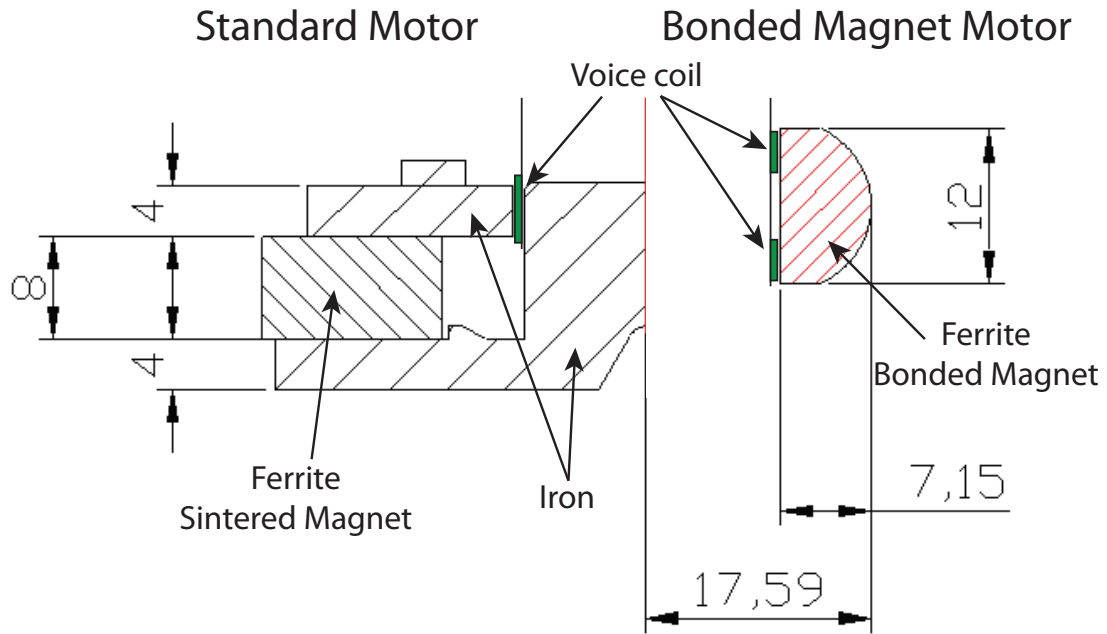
Close view of both motor structure cross sections (all dimensions are in mm).
